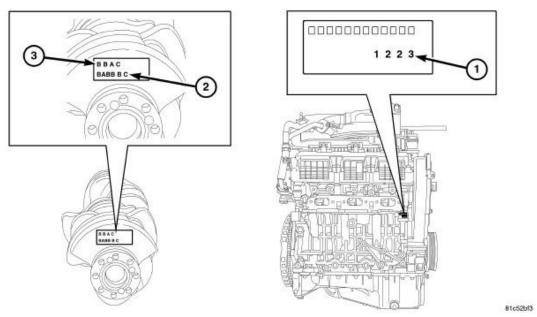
Engine Block Main Bearing Codes, Rod Bearing Codes & Crank Main Bearing Code Courtesy of CHRYSLER LLC
